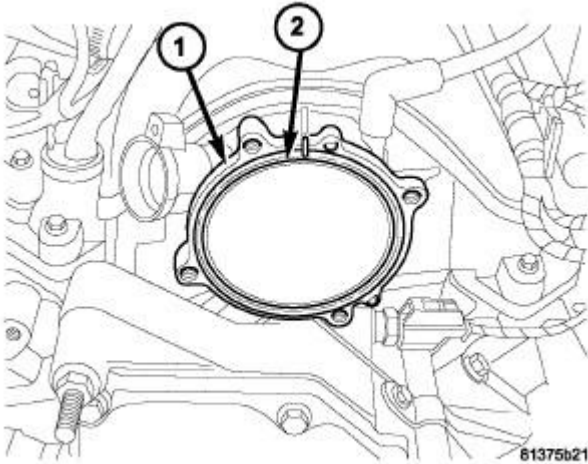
Throttle Body O-Ring At Front Of Intake Manifold
